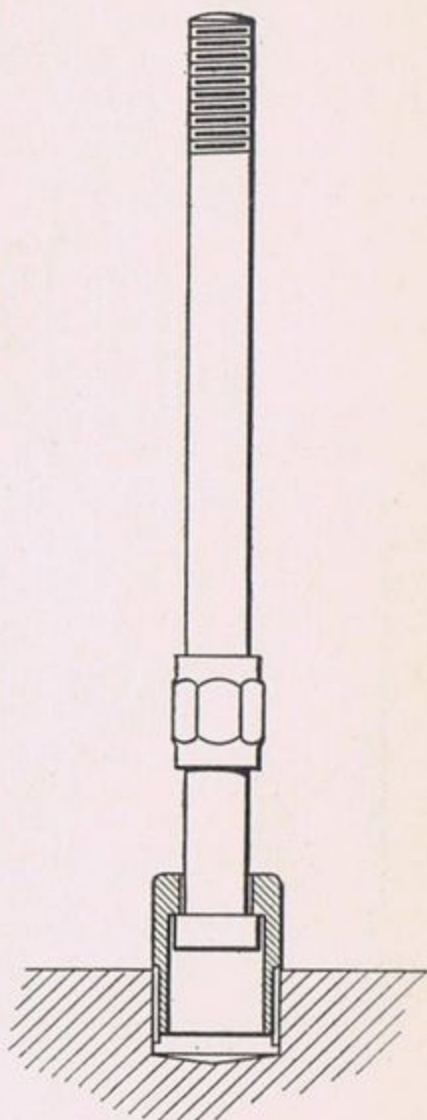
CYLINDER HOLDING-DOWN BOLT (Two-port model)
